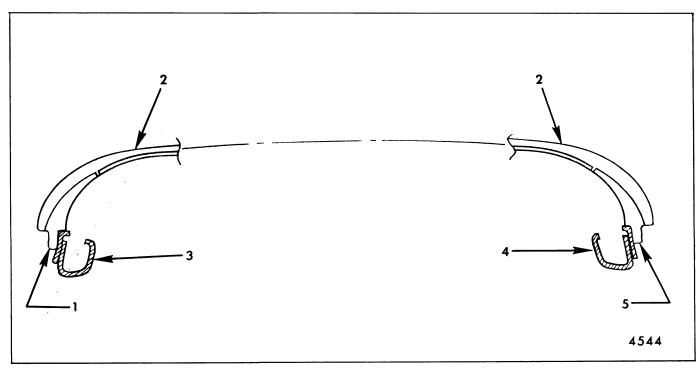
Cross Section of Side Rail to Center Bow Stop Alignment
